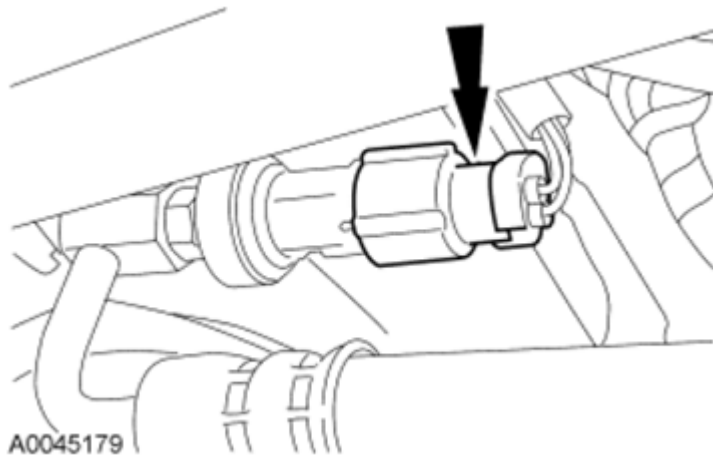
Locating Power Steering Pressure Switch Electrical Connector
